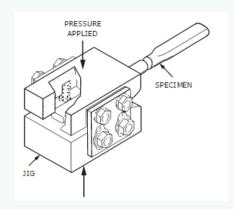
Squeezing Jig for Flattening Ends of Full-Size Tension Test Specimens
